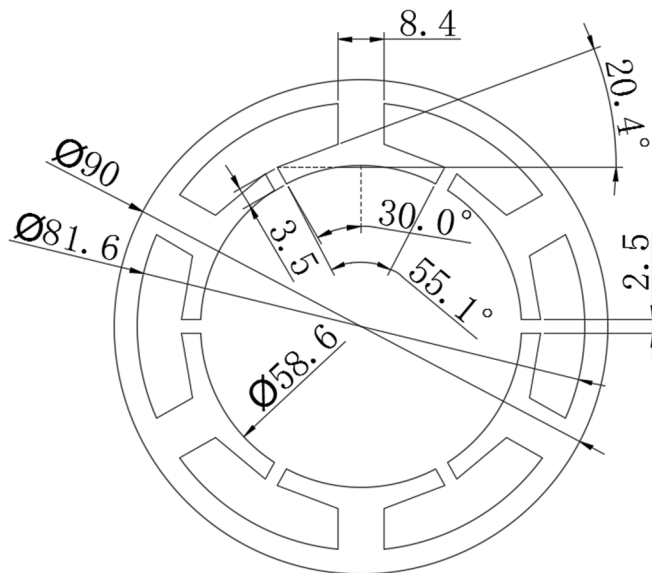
6-slot stator dimensions for SPM-FRPM machines.
